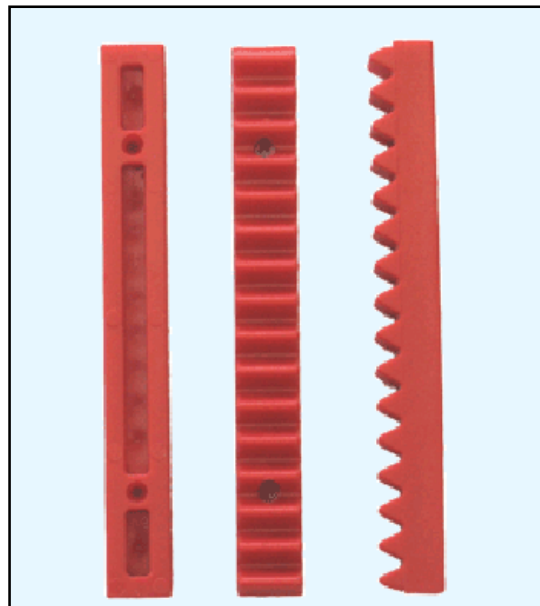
Gear Rack for Translation of Rotary Movement to Linear Movement
